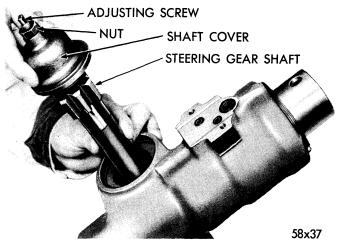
Removing or Installing Gear Shaft and Cover Assembly
